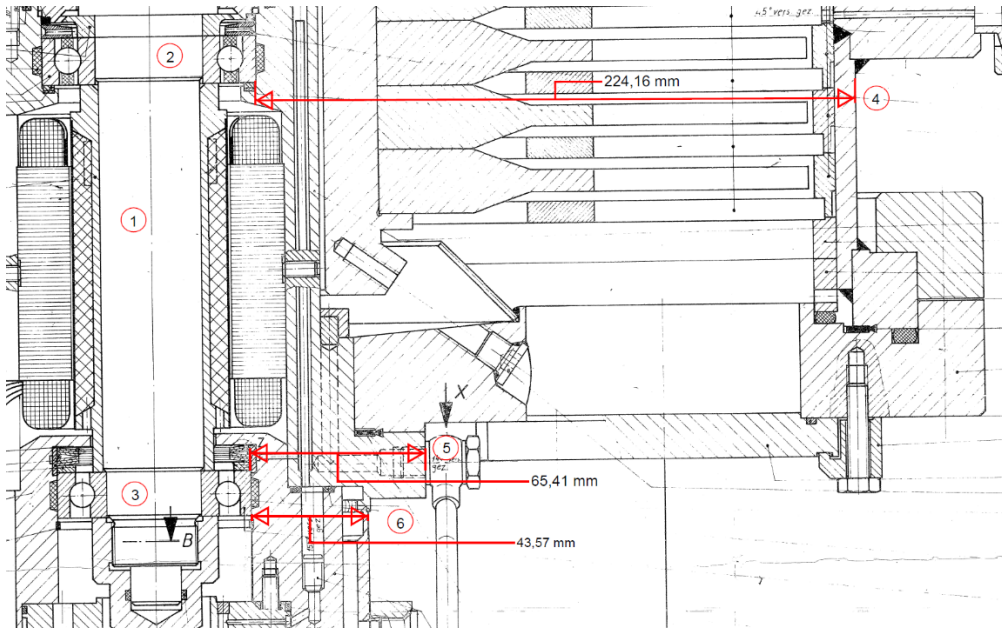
Detail of the overall technical drawing of the AUG centrifuge. The shaft (1) and the upper (2) and lower (3) bearings are shown. The distances of the possible measuring points (4, 5, 6) were determined by comparison with other, dimensioned distances on the drawing.
